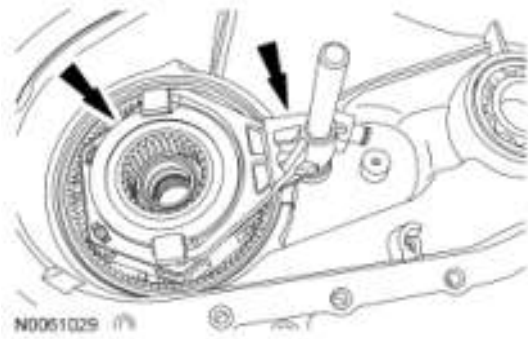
Locating Reduction Shift Fork And High-Low Collar
